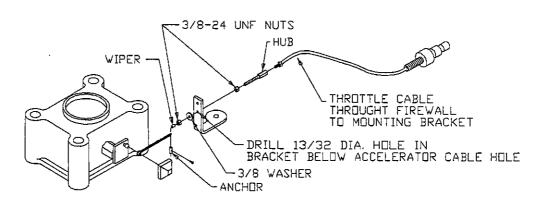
MOUNTING CABLE TO CABLE ANCHOR
